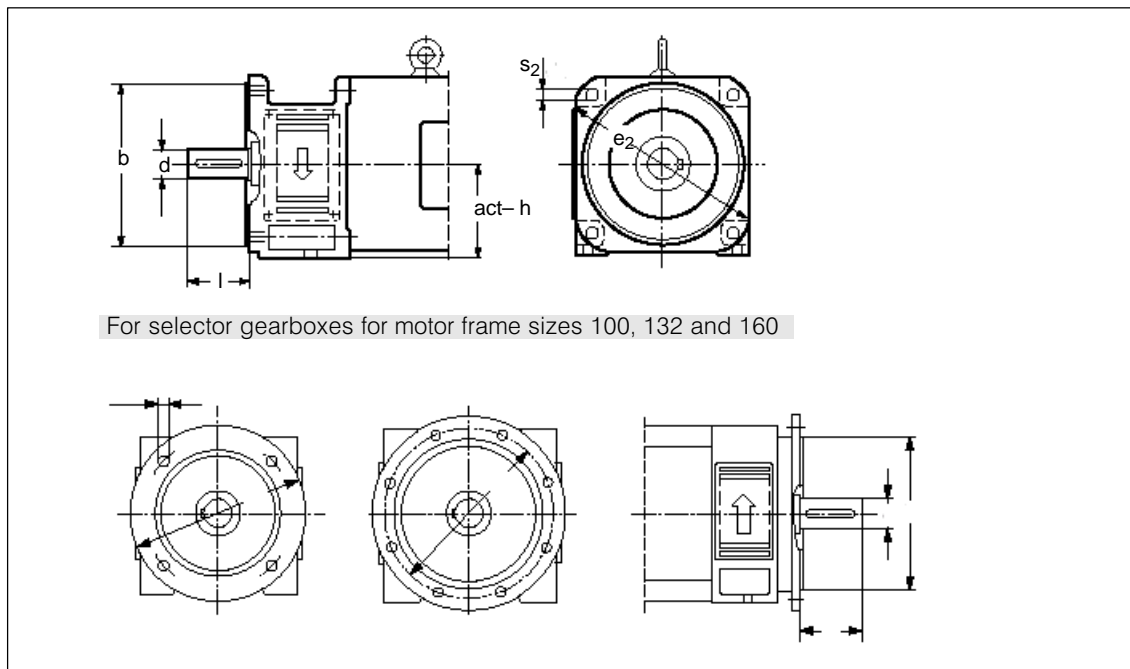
Flange dimensions for AC motors (dimensions refer to the Table 3-10)
